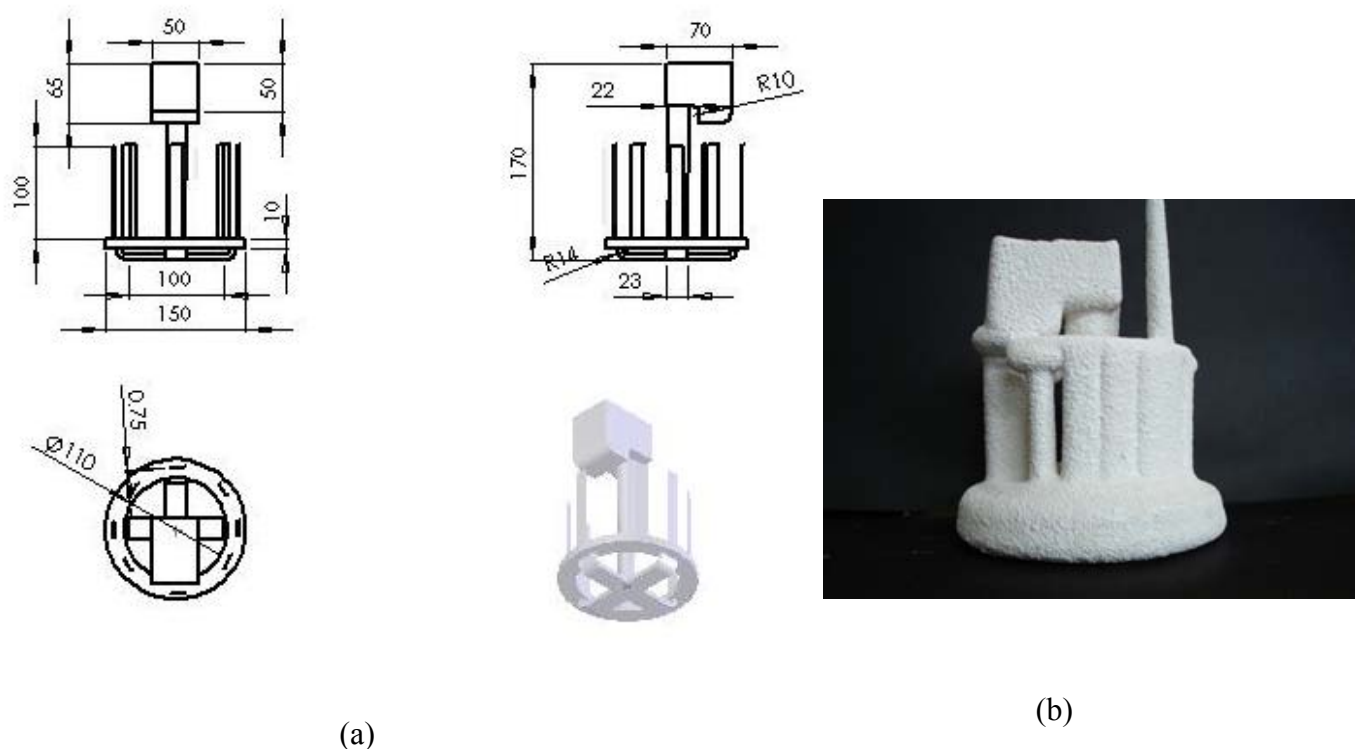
Ceramic moulds design to produce test pieces with thickness 0.75mm for a tensile test
